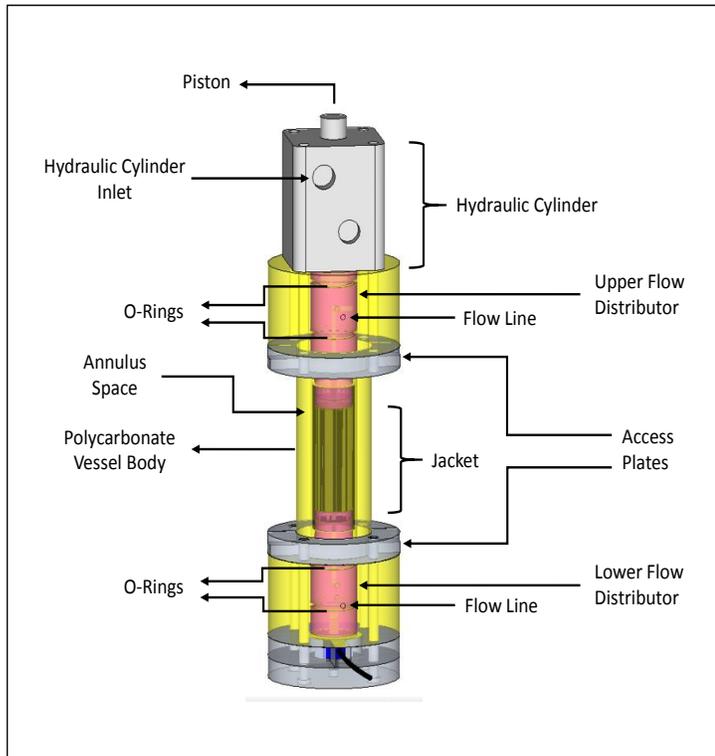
Components of core holder assembly designed by CQI laboratory staff.
